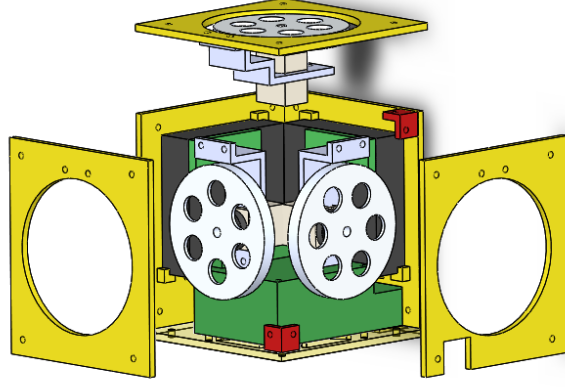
Exploded view of the CubeSat prototype and its components.
